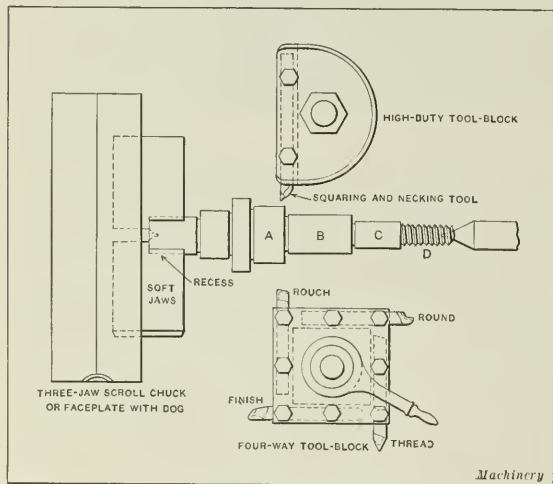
Lathe Set-up for Operations requiring Five Tools
